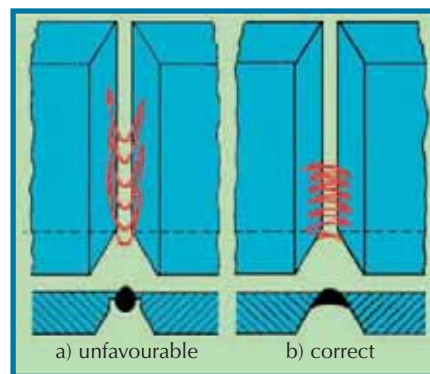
Stick electrode manipulation during the vertical-up welding of butt welds.
